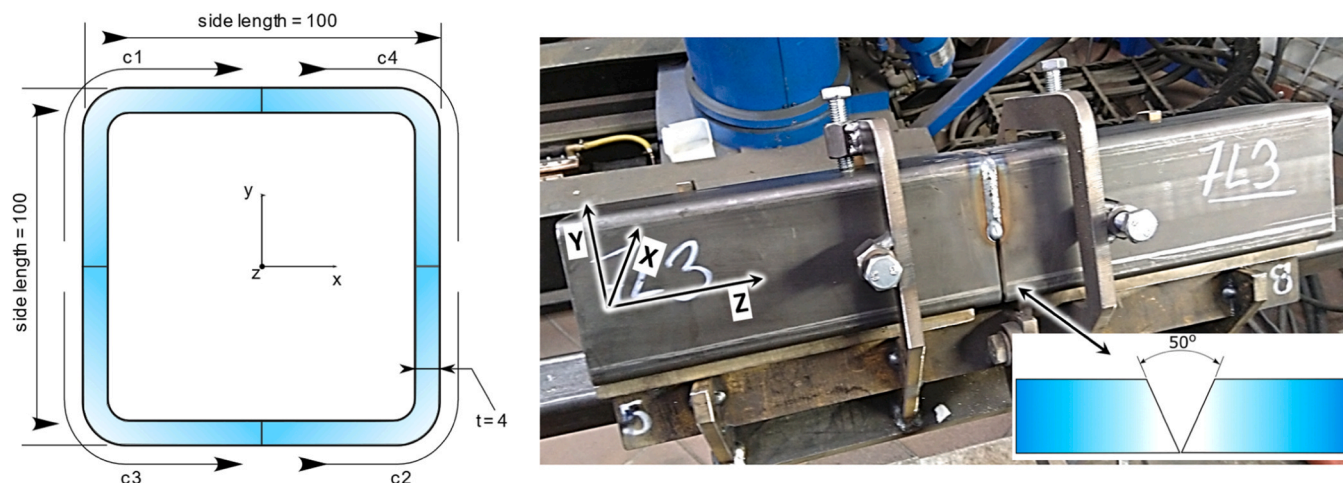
Welding sequence and directions (left) and welding set-up with butt weld groove geometry (right).
